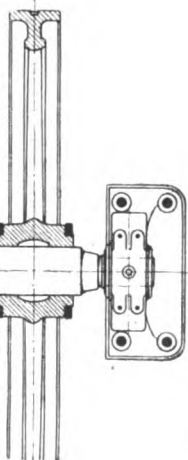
VALVE GEAR OF "RIEDLER" AIR COMPRESSOR.
